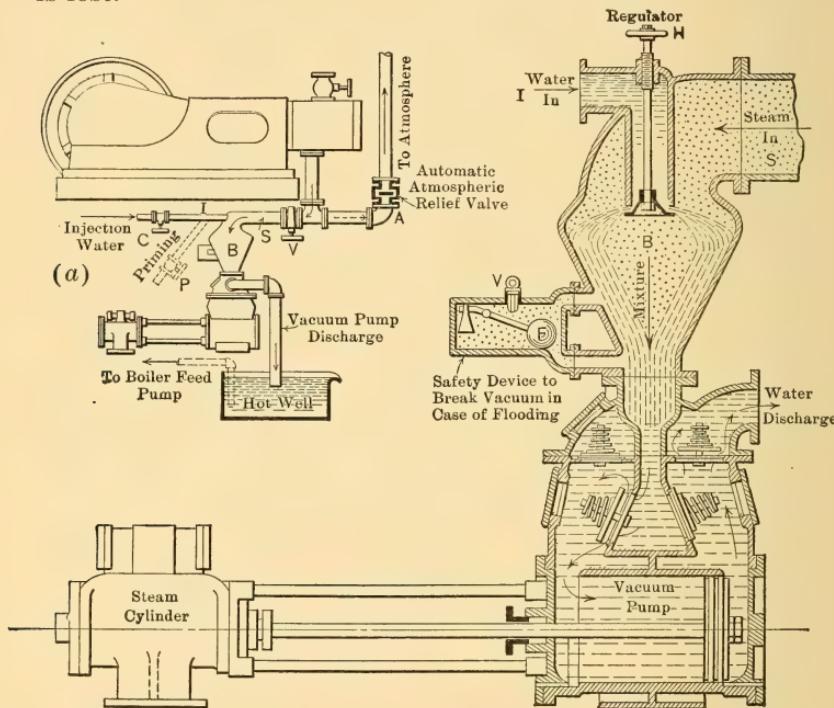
Jet Condenser and Method of Connecting to Engine.
